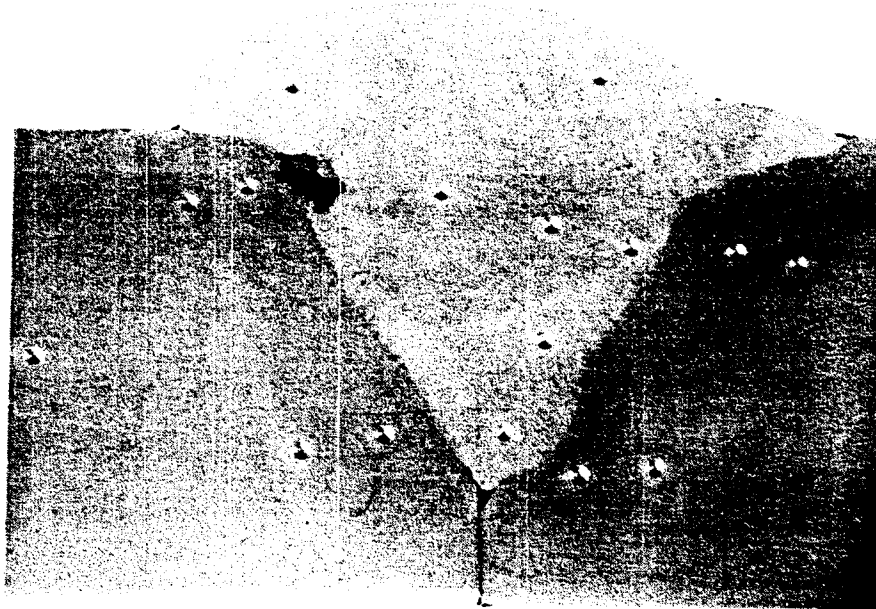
Incomplete Fusion at Sidewall and Incomplete Joint Penetration at Root
